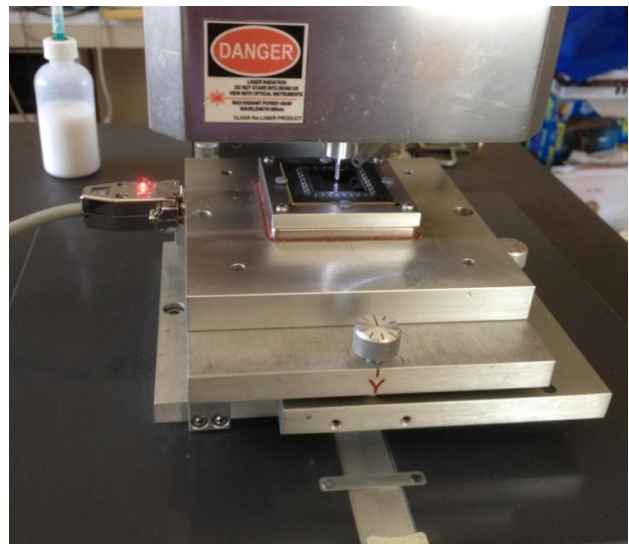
BGA mounted and electrically connected to the floating endpoint sensor plate. Nylon screws provide a constant gentle down pressure to hold the balls in contact with the plate.
